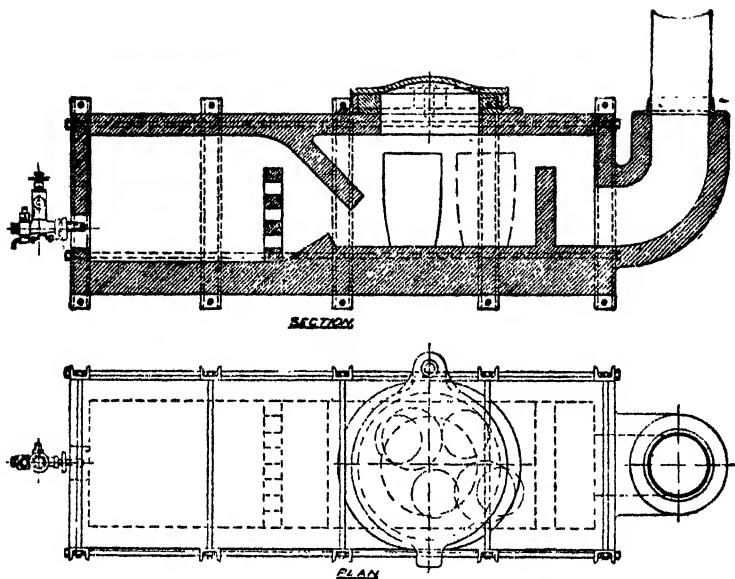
Section and plan of crucible furnace designed by Messrs Taite & Carlton.
